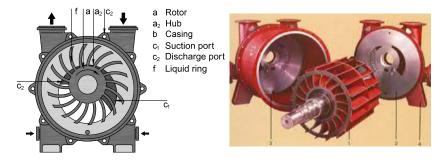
Sectional of a liquid-ring vacuum pump rotary compressor.
